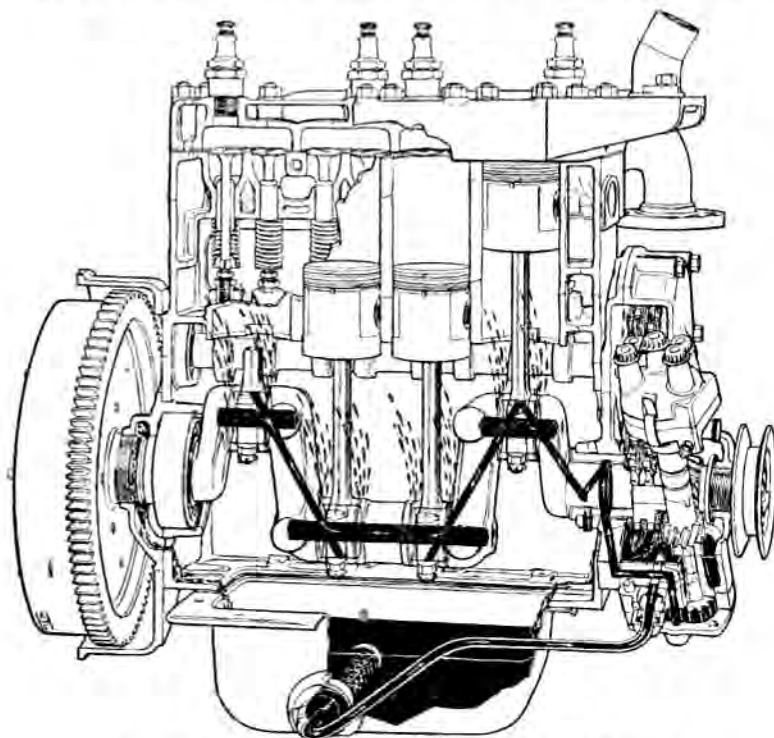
THE LUBRICATION CIRCUIT OF THE MINOR ENGINE
